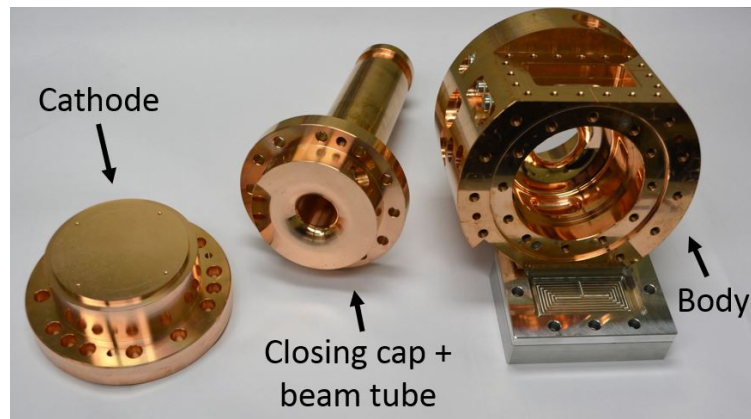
Machined parts of the ELI-NP RF Gun before cleaning and assembly.
